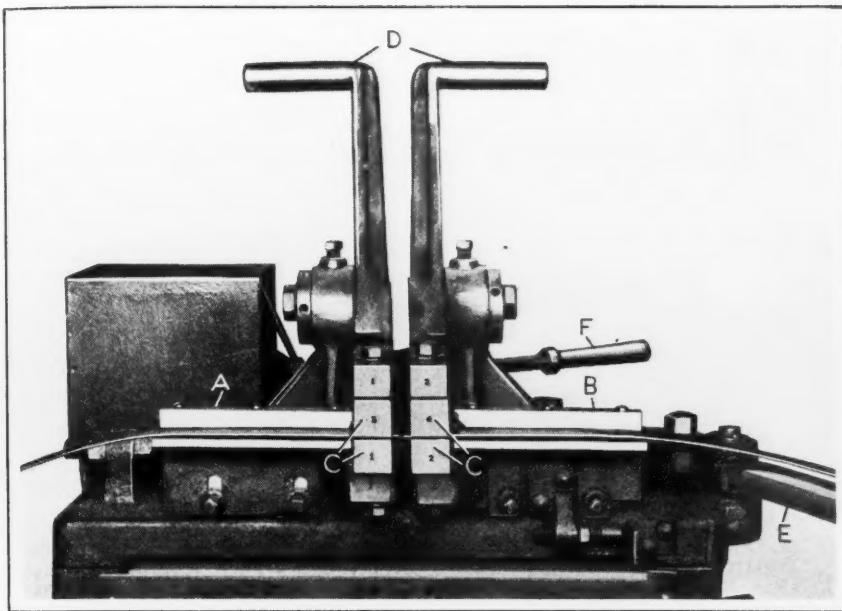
Set-up for Butt-welding and Annealing the Joint
